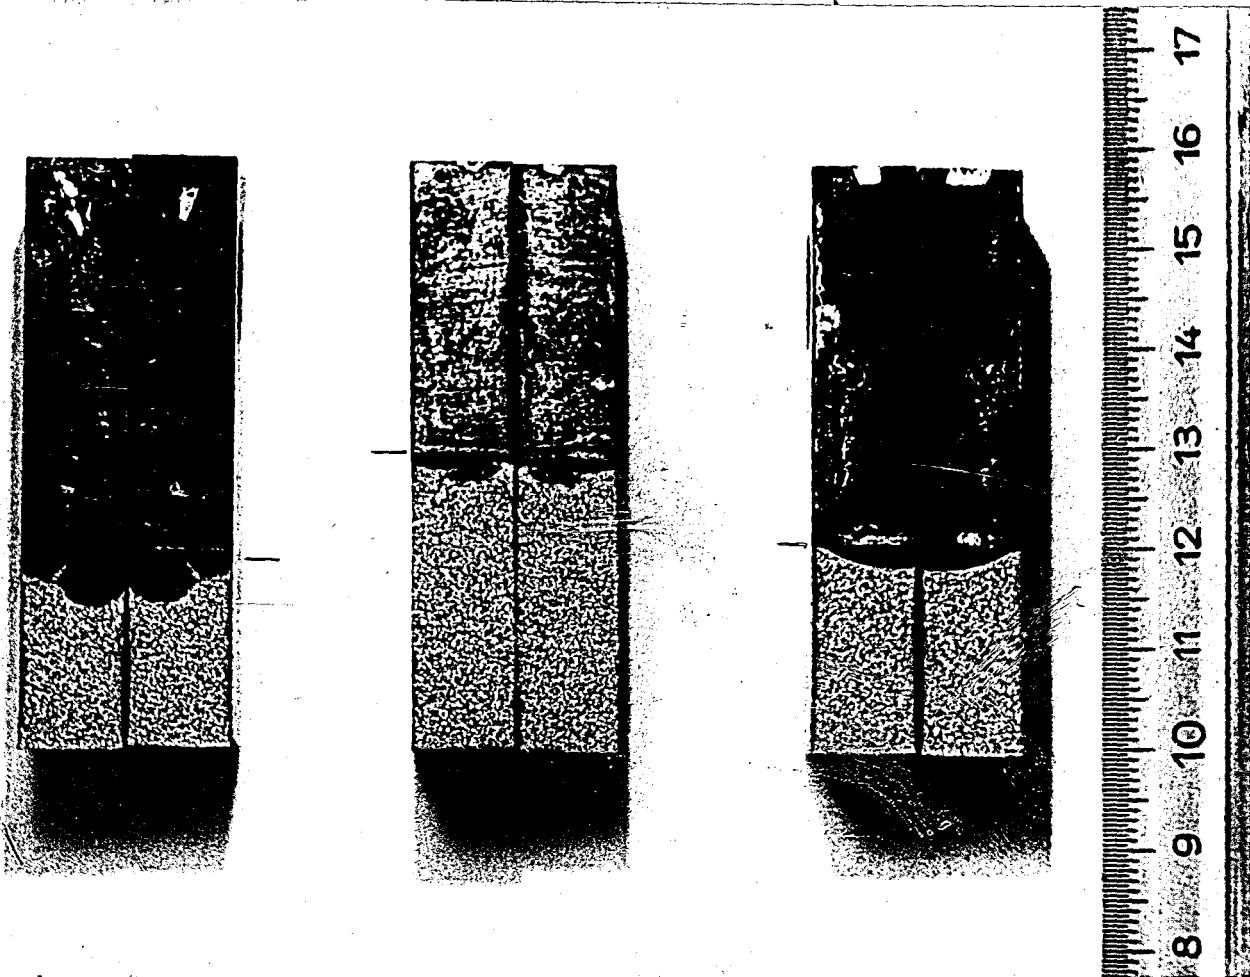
Fracture surfaces of specimens no B, 5 and A.
